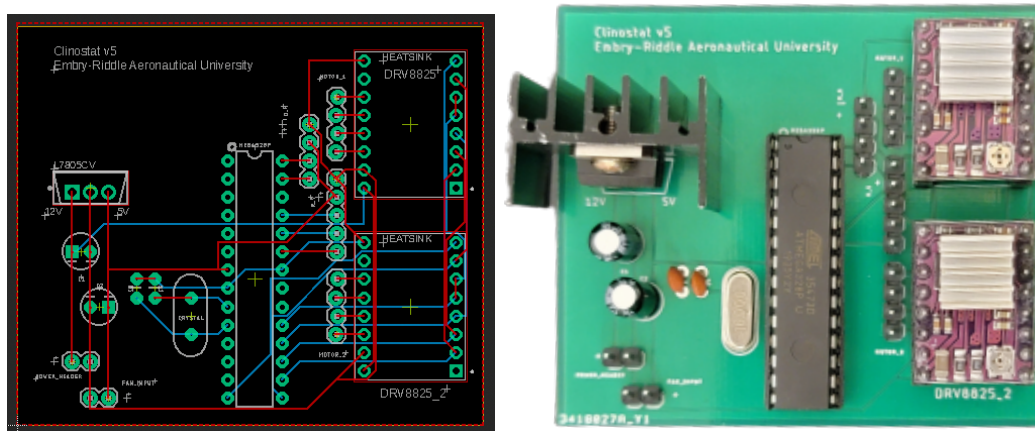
The PCB design (left) compared with the assembled board (right).
